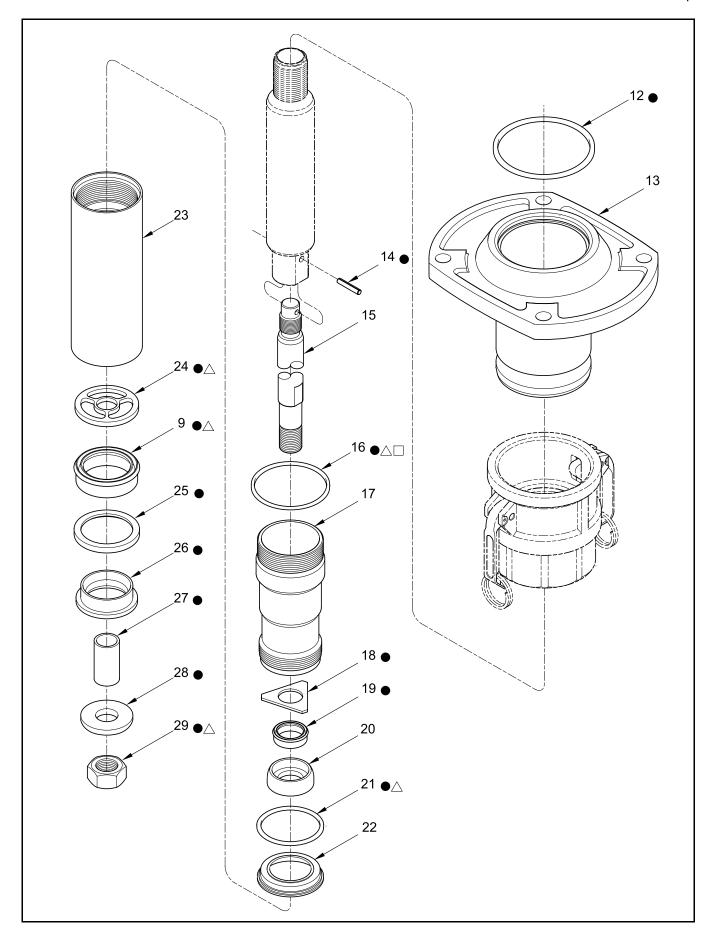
B Medium-Pressure Bulk Grease Pump Model 7736 - Exploded View
